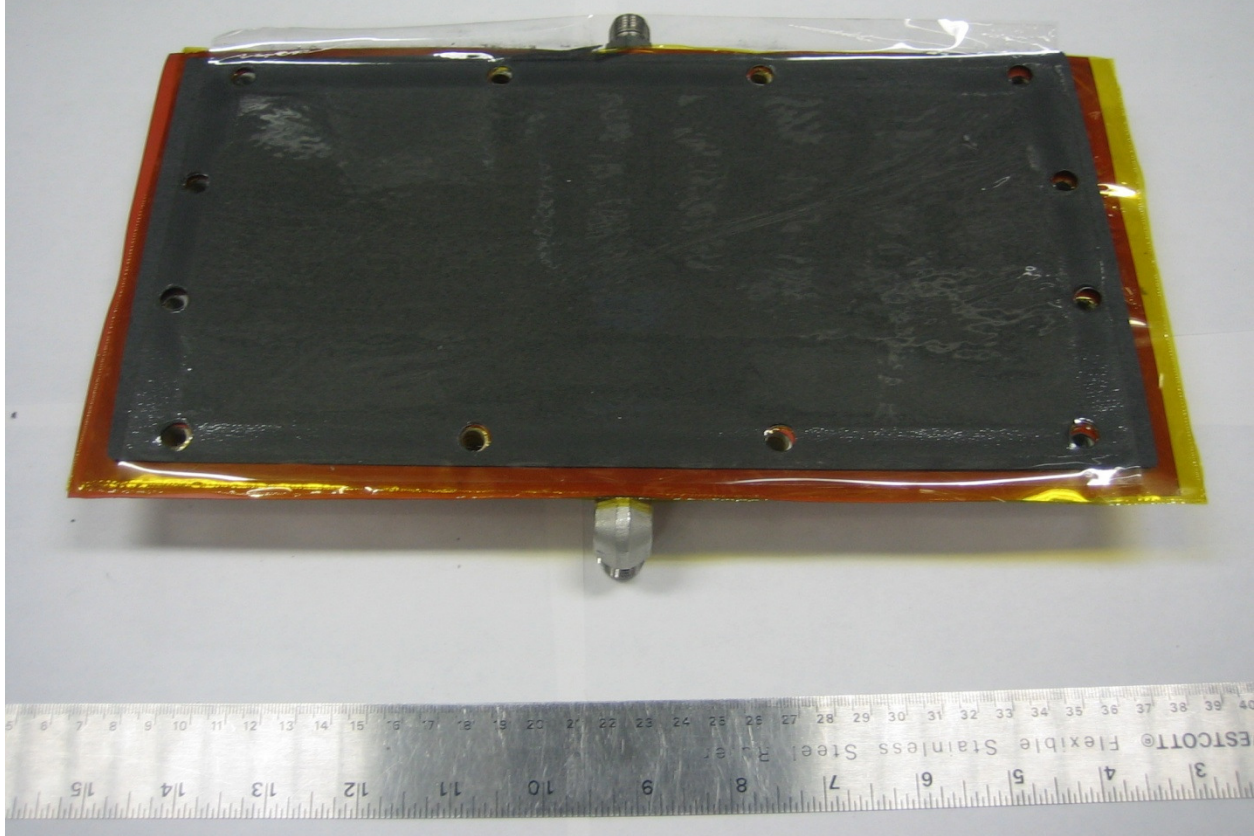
Fixture: Dry-side casing with GDM and membrane
